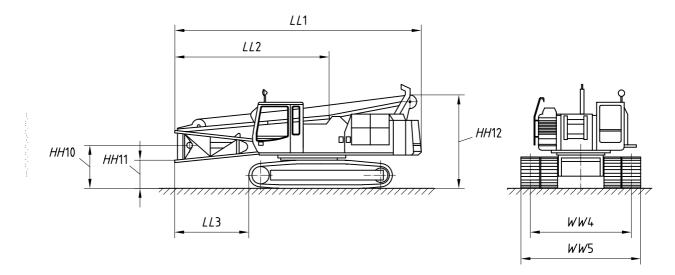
Transport and shipping dimensions of crawler-type machine with basic equipment
